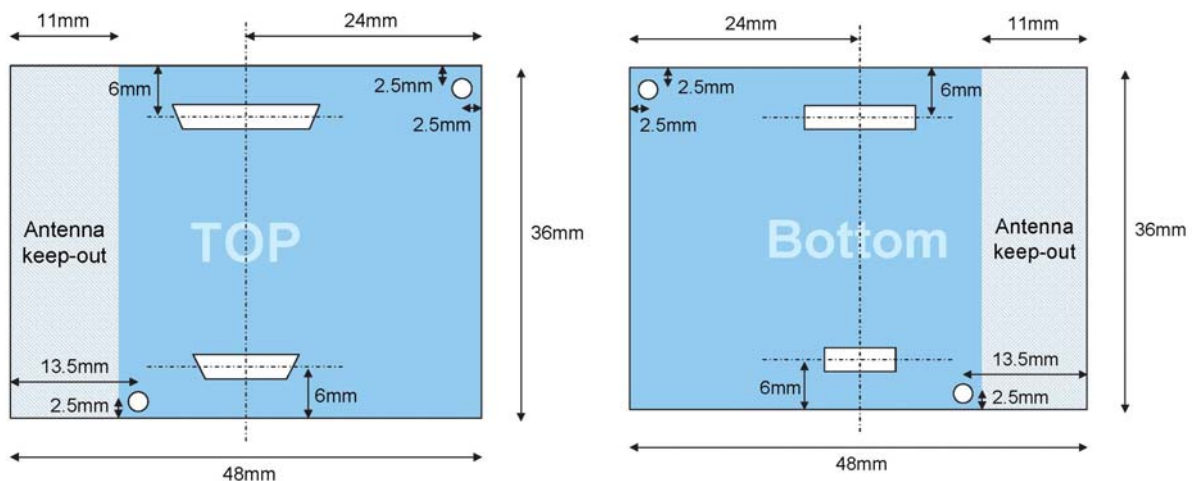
Mechanical Outline Drawing of OEM Edition Module
